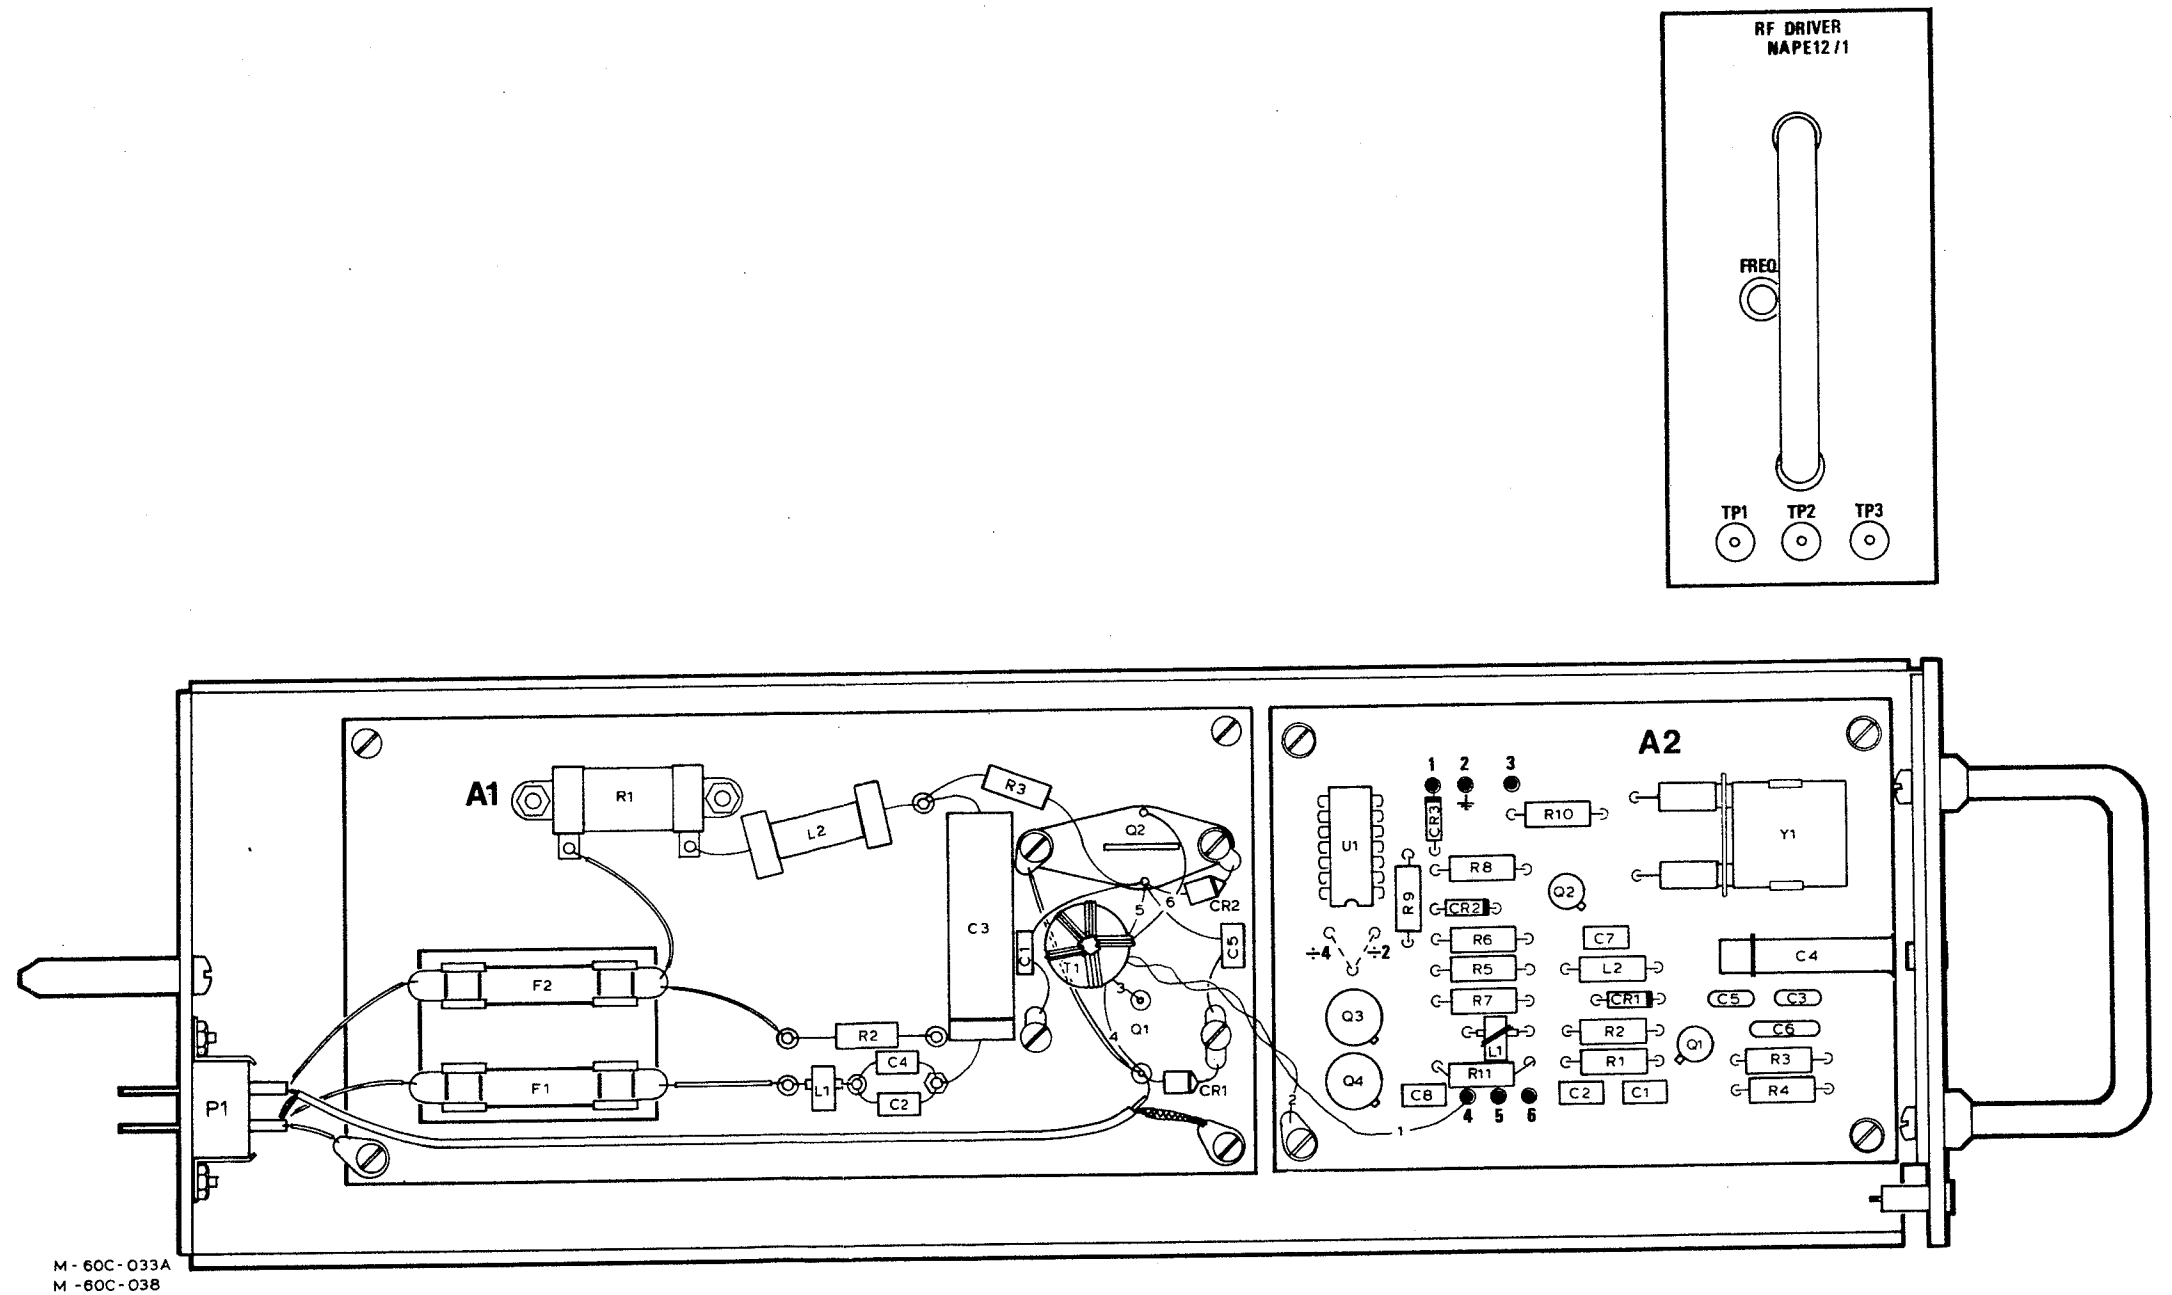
Assembly Detail - NAPE12/1 RF Driver Module
